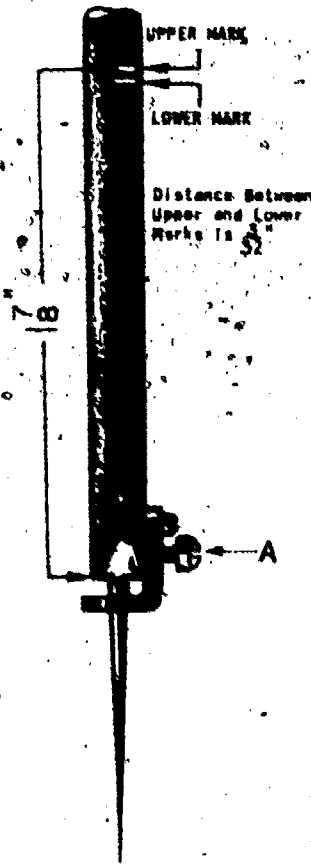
Marks on the Needle Bar of the 111W152 Sewing Machine.
